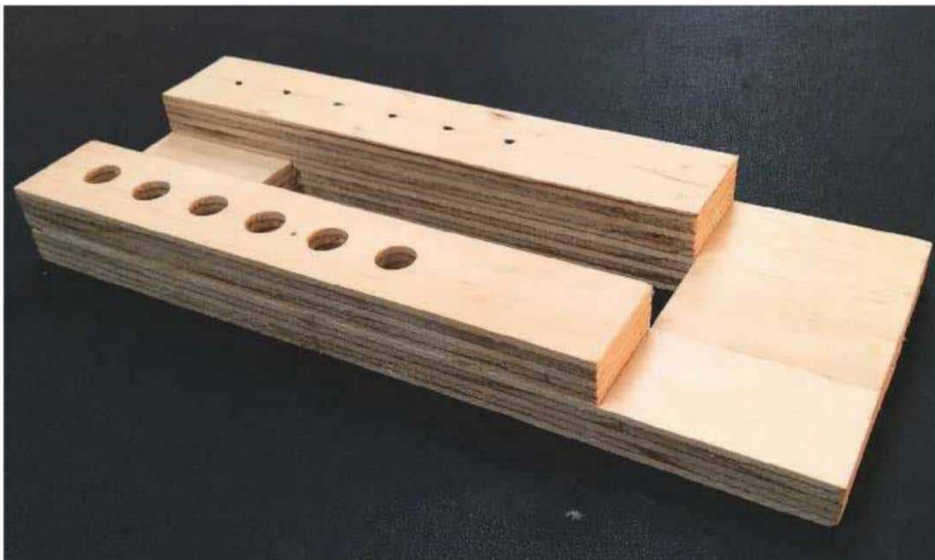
Holes marked out for nail positions when attaching 180 × 30mm pieces
